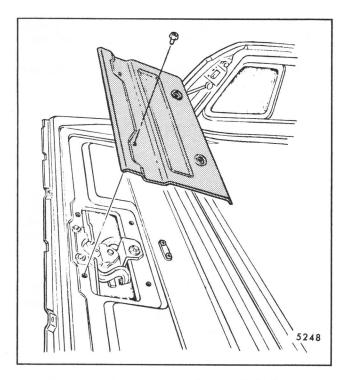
Tailgate Inner Panel Access Hole Cover
